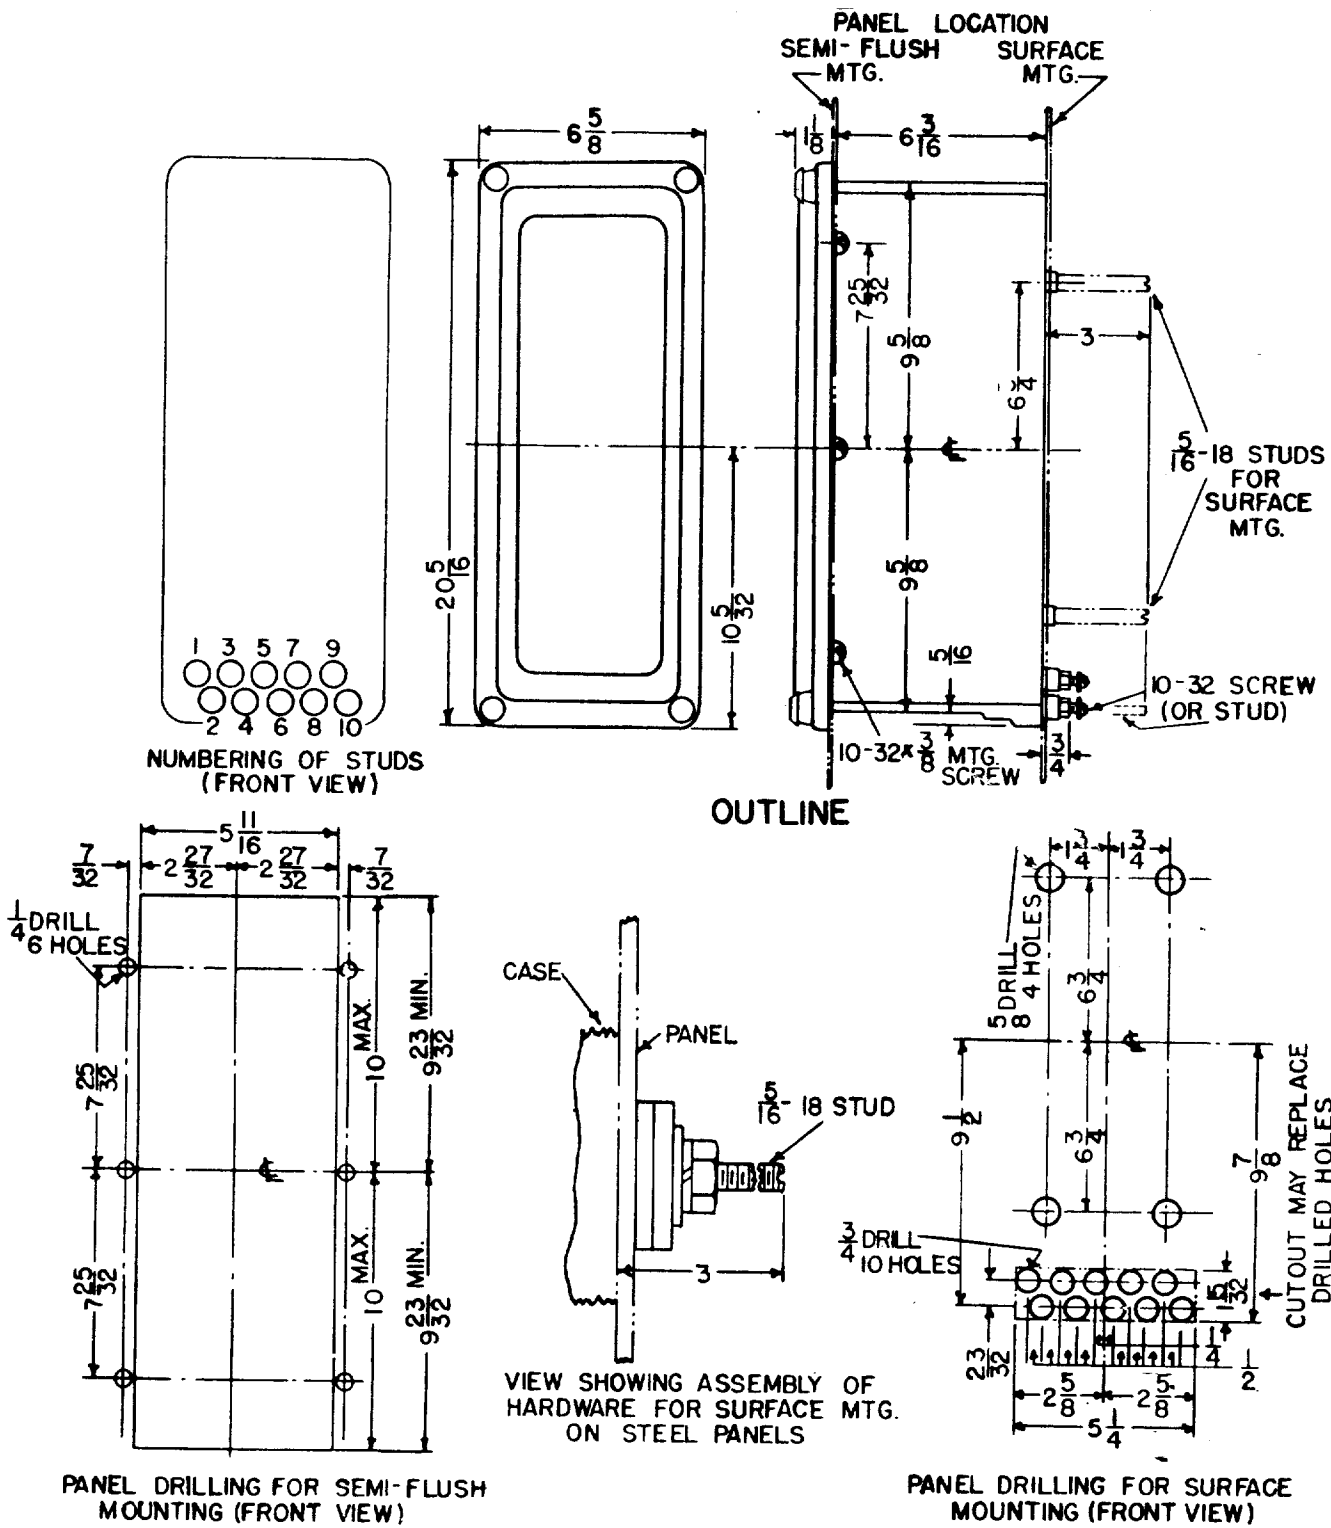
(K-6209275-1) Outline And Panel Drilling Dimensions For The Lage, Single Ended (L1) Case
